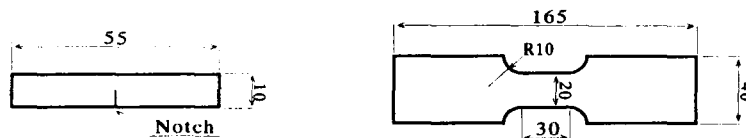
Dimension of specimens (right : tensile specimen, left : SENB specimen).
